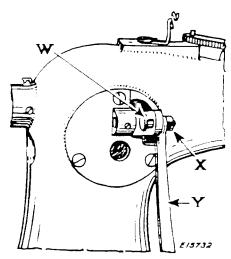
Adjusting Feed Rolls - Machine 7-56
